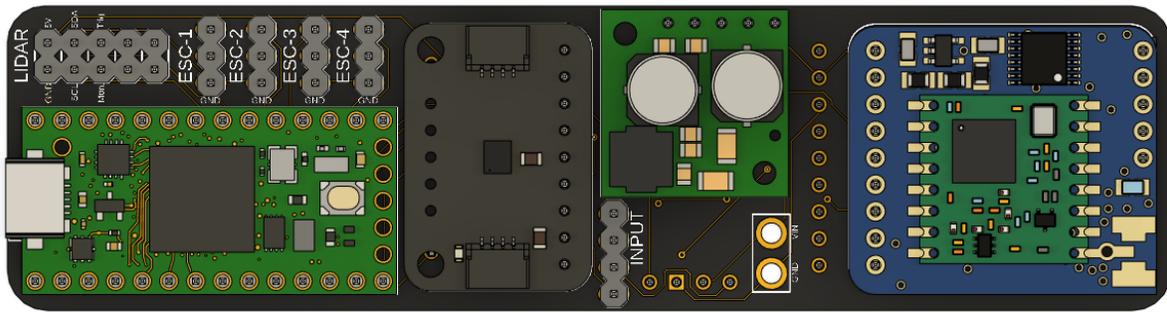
UAV PCB 3D Board (Top Profile)
